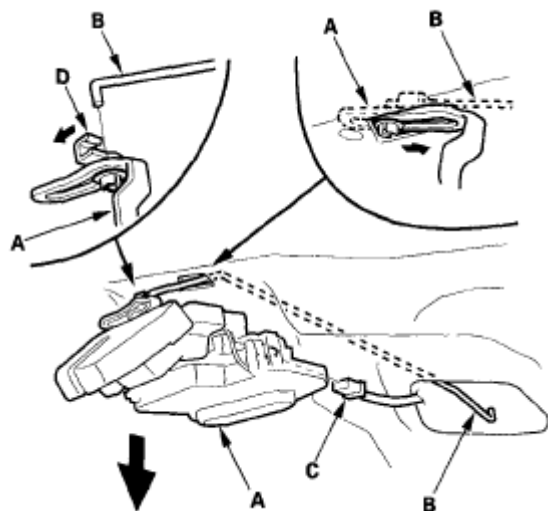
Identifying Trunk Lid Latch, Cylinder Rod And Latch Switch Connector
